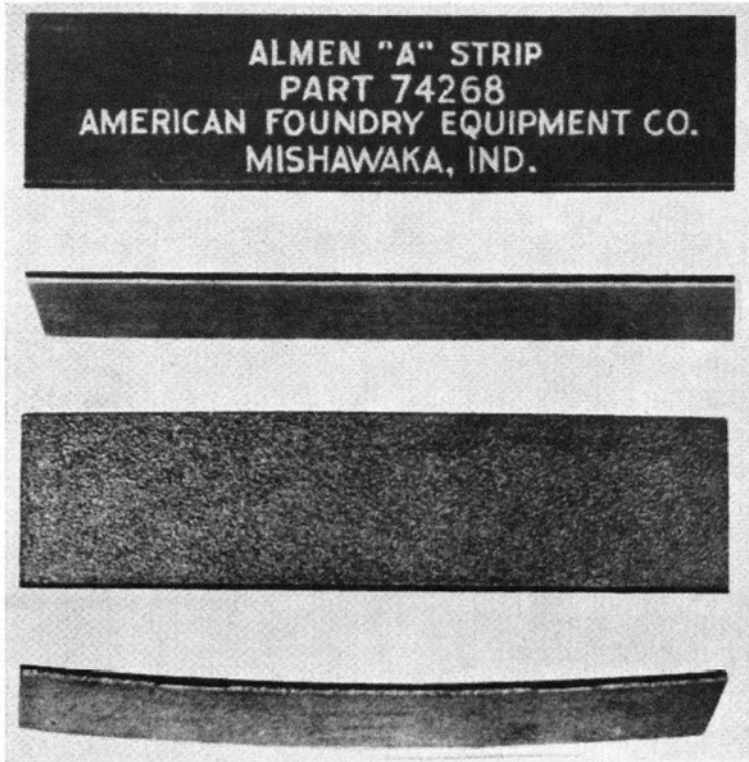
ALMEN TEST STRIPS BEFORE AND AFTER SHOT PEENING.
